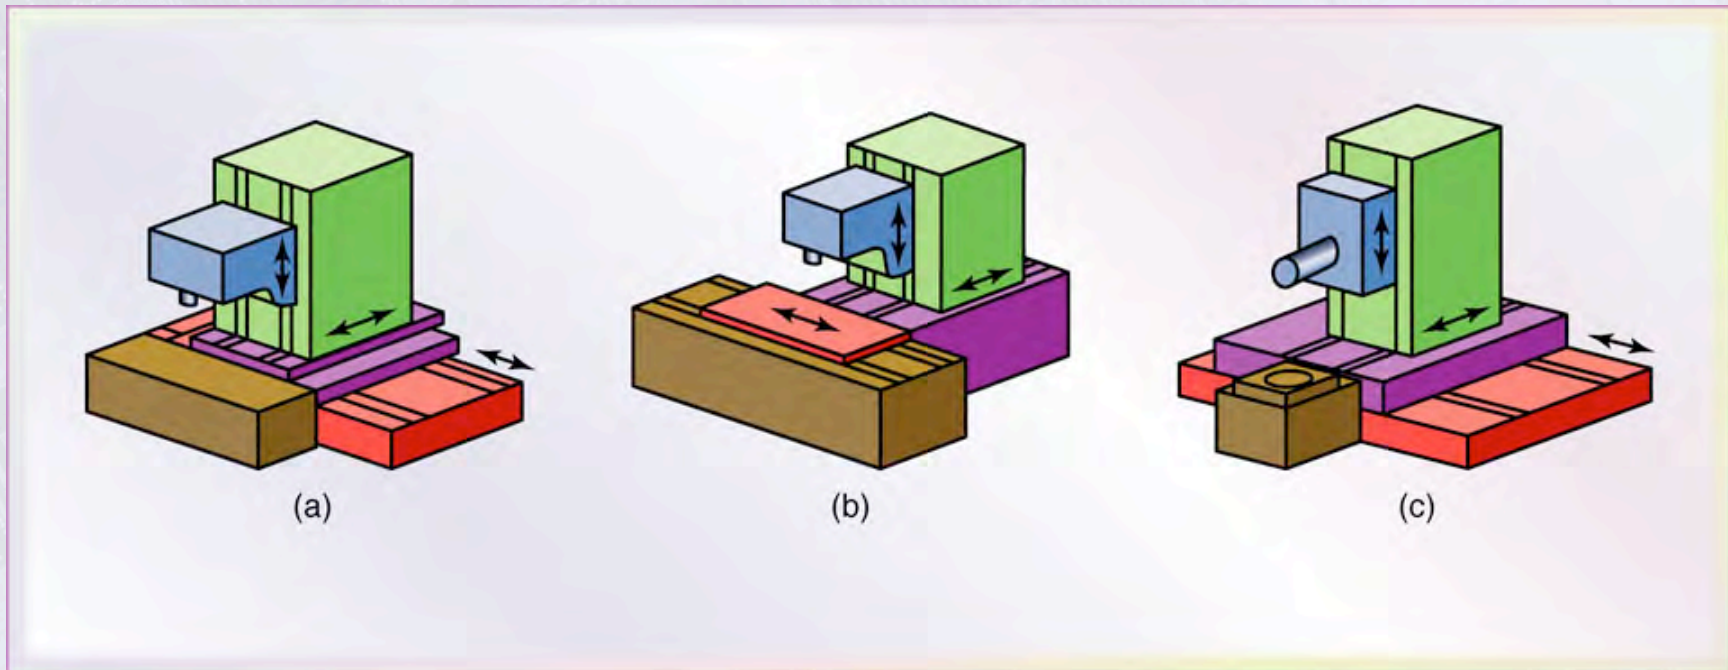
Schematic illustration of a reconfigurable modular machining center capable of accommodating workpieces of different shapes and sizes and requiring different machining operations on their various surfaces. *Source:* After Y. Koren.
